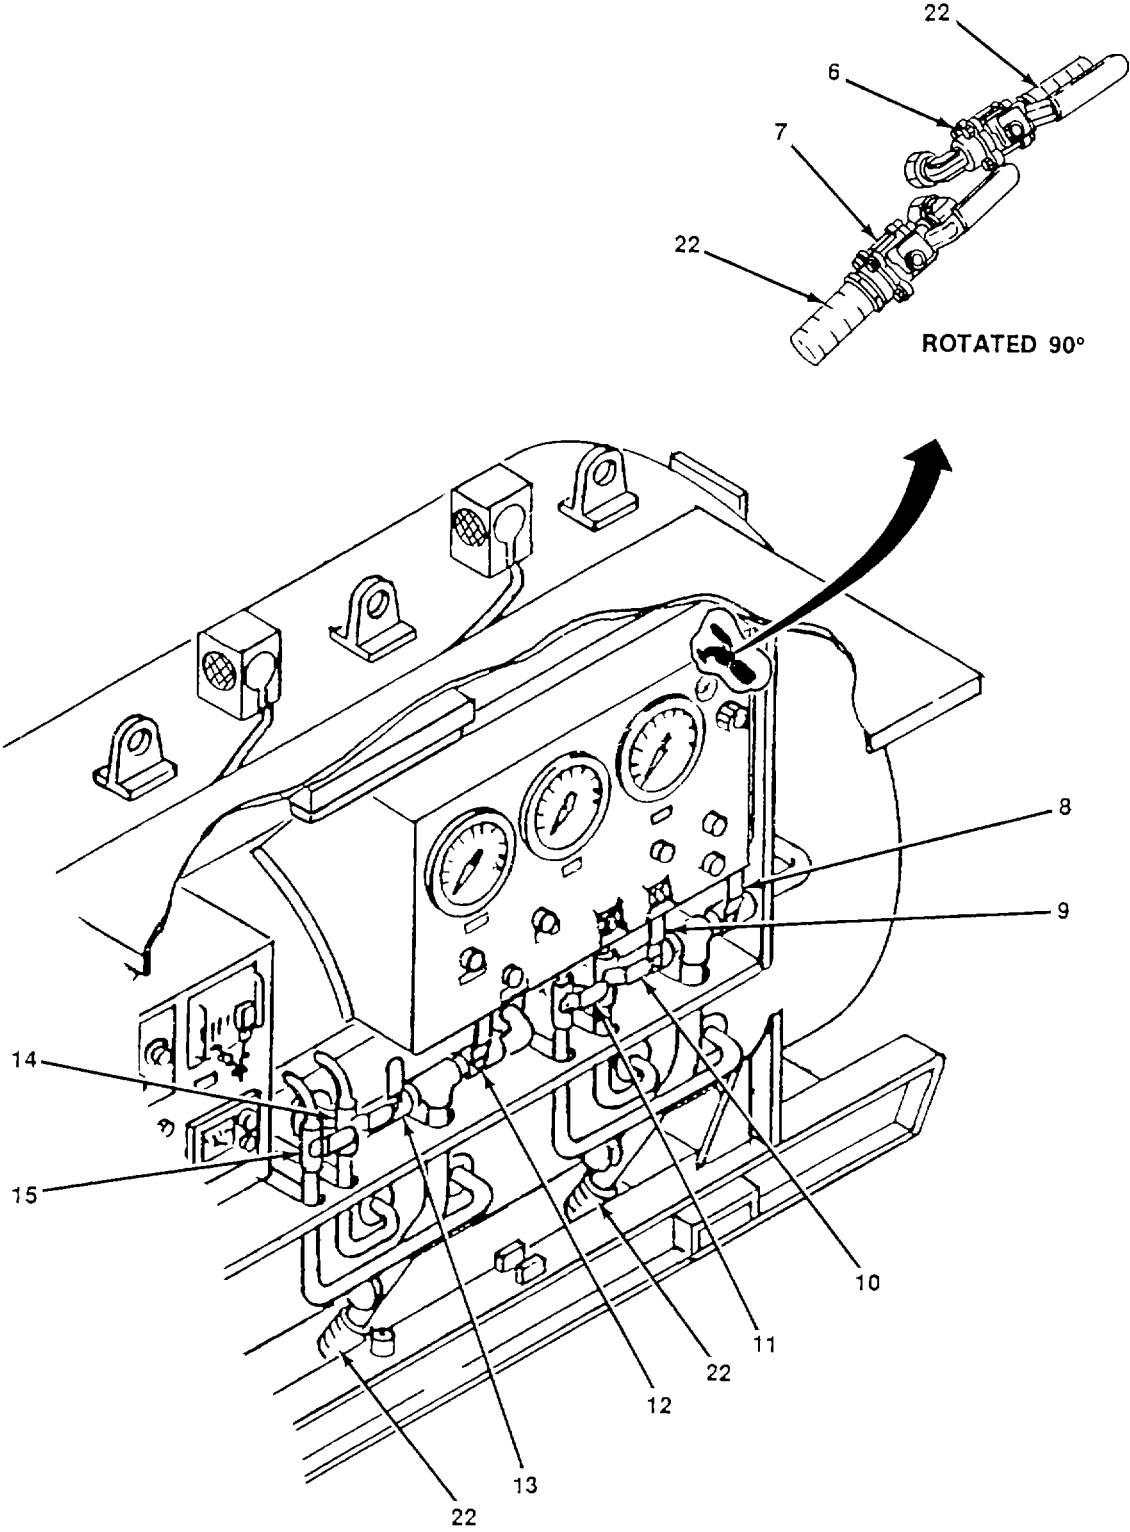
Gages, Valves, and Switches Controls and Indicators (Sheet 2 of 2).
